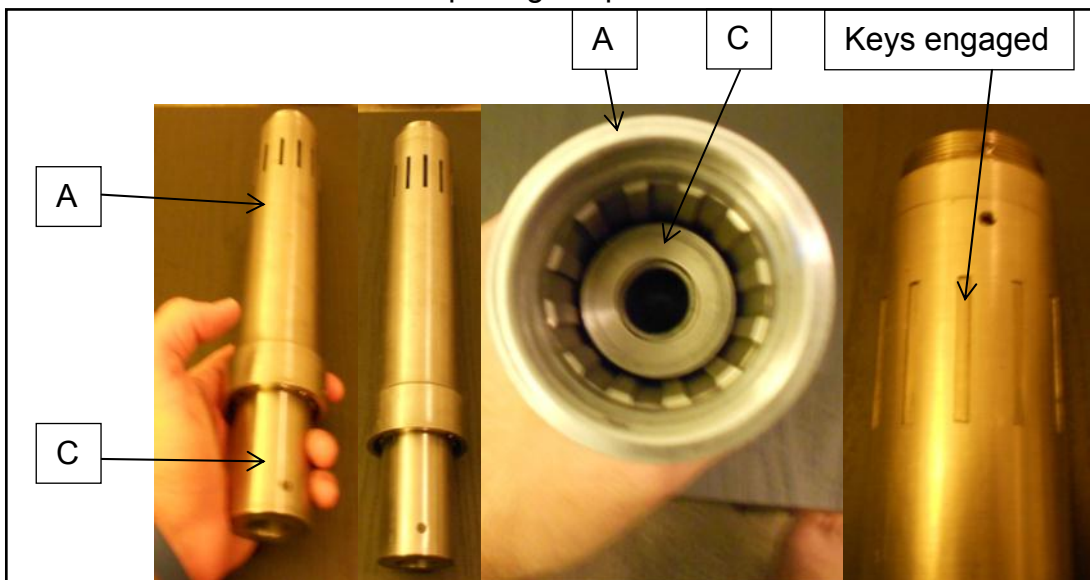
Probe assembly step 3 showing Part A, Part C, and the keys
